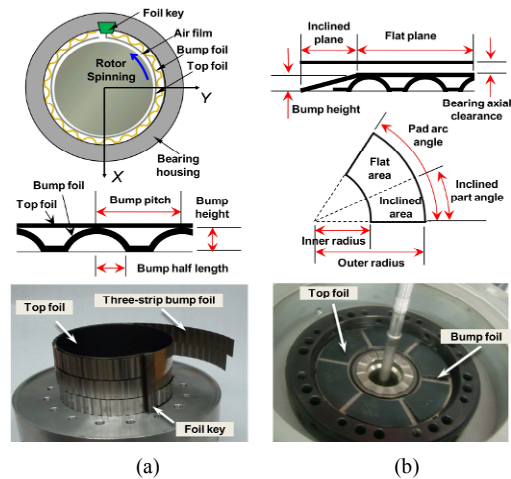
Configuration of bump-type test GFBs for high-speed PM motor: (a) journal GFB; (b) thrust GFB.
